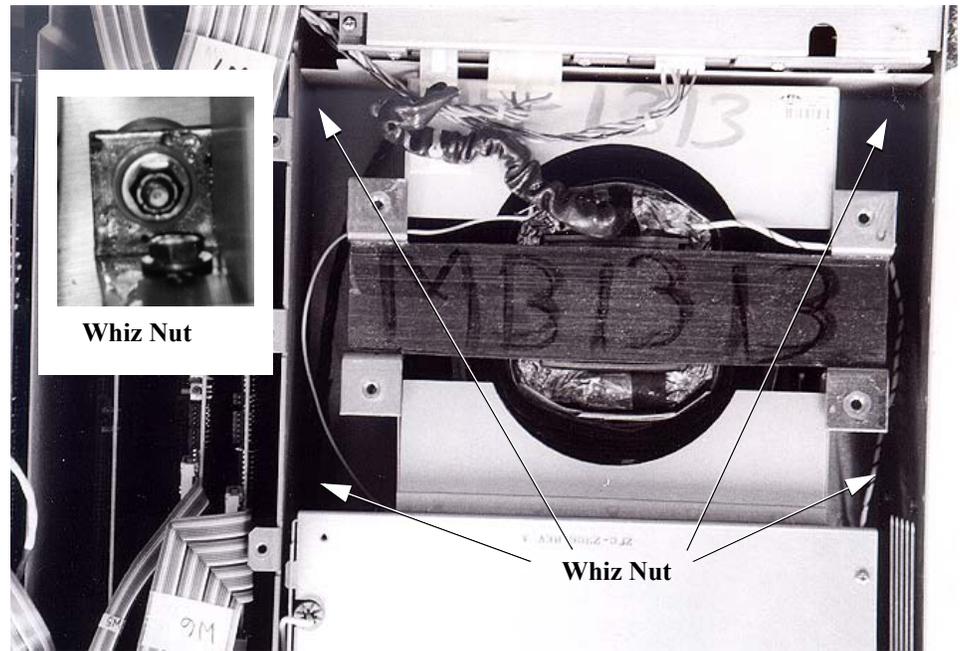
Transformer Cover, Screw Locations on Side Panel
